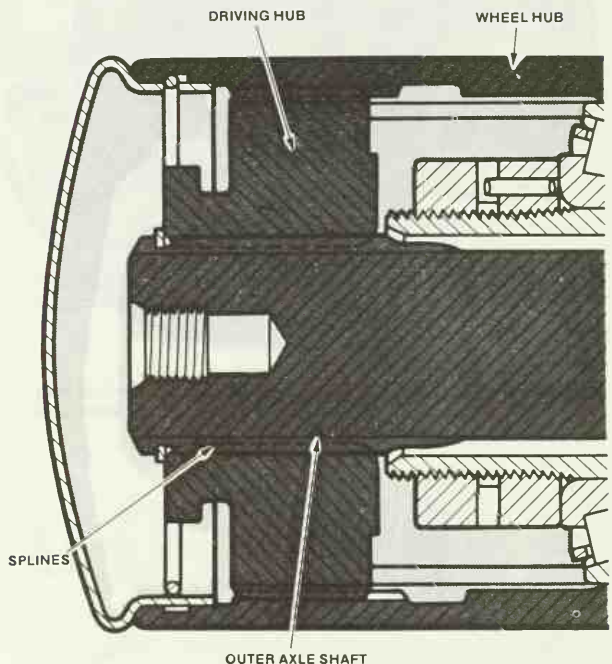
Full-time transfer case units use hubs that are locked to the drive axles by splines. (Ford Motor Company)
